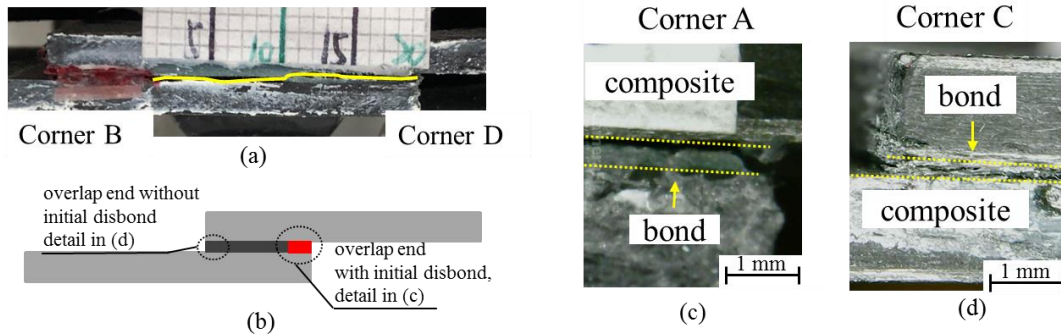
(a) Crack paths at failure of specimen F2, (b) Schematic drawing indicating the two crack propagation sites observed from (c) corner A and (d) corner C in specimen F1
